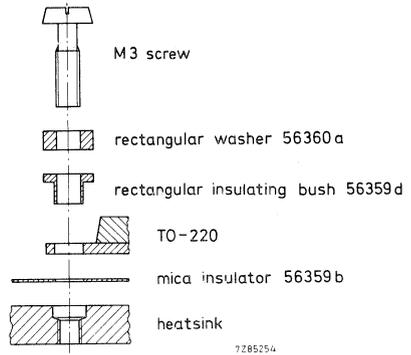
Insulated screw mounting with rectangular washer into tapped heatsink. Known as a "top mounting".
